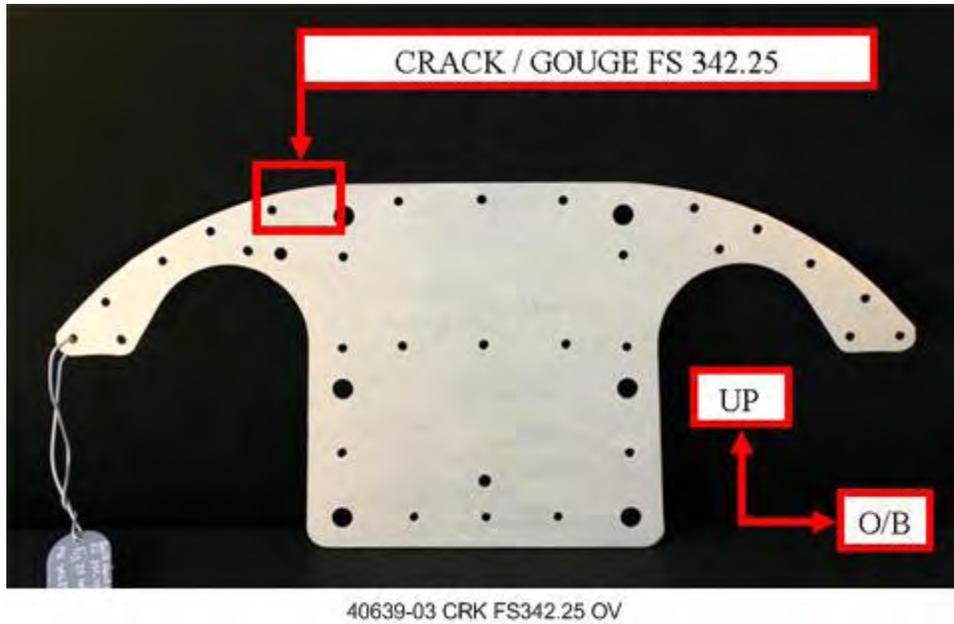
Location of Gouge and Crack on the Bulkhead Assembly FS 342
